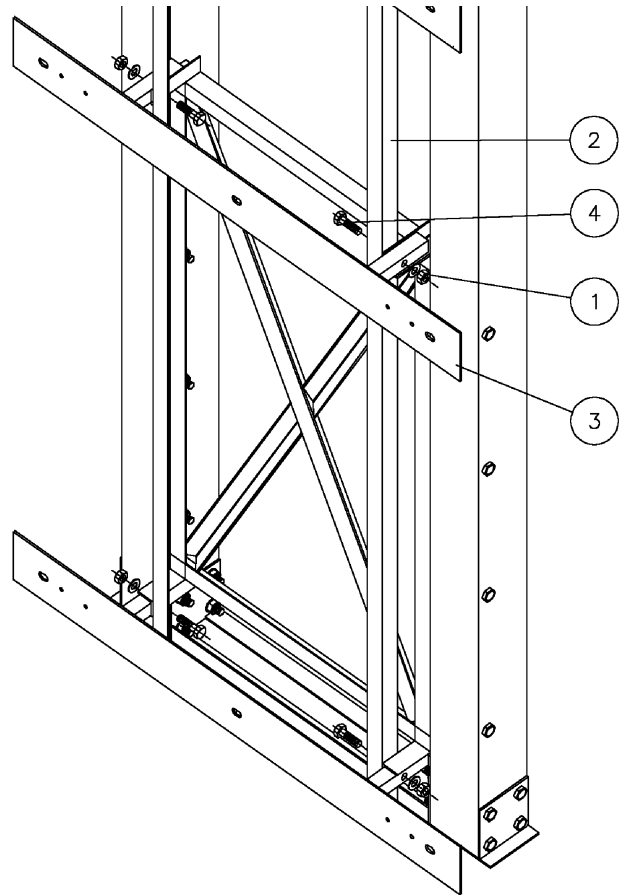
Removing the lower counter weight guide bolts. Looking from behind the guide rails.
